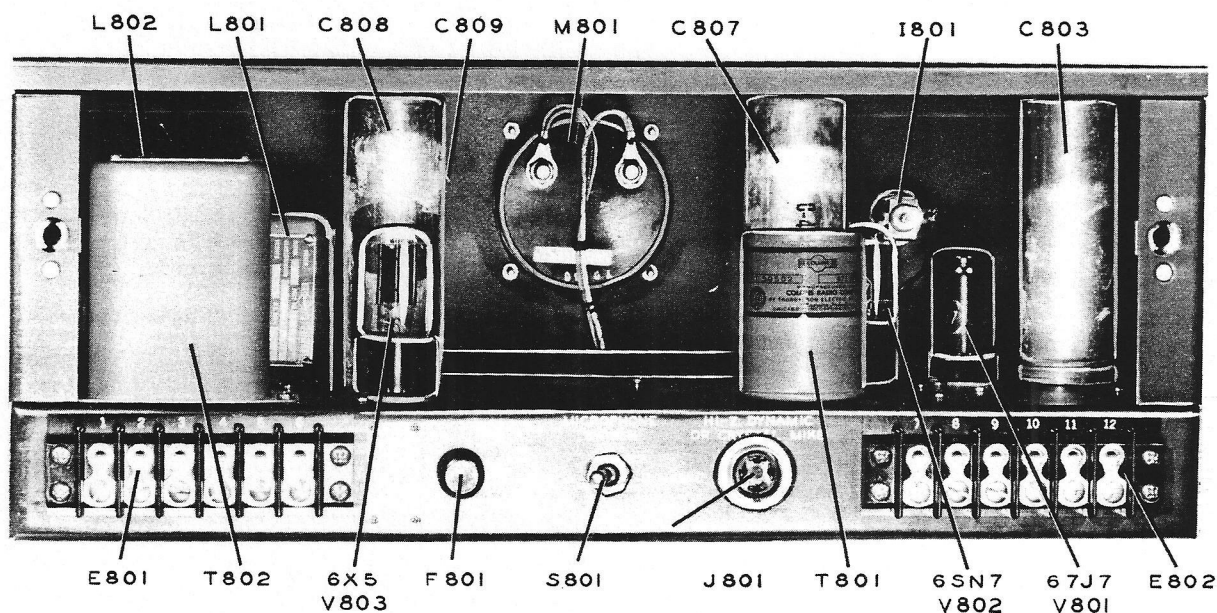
Type 177L-2 Remote Control Unit, Parts Arrangement - Top
